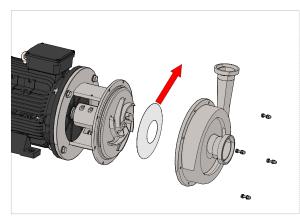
Adjust retainer pin with rotary seal part grove.
